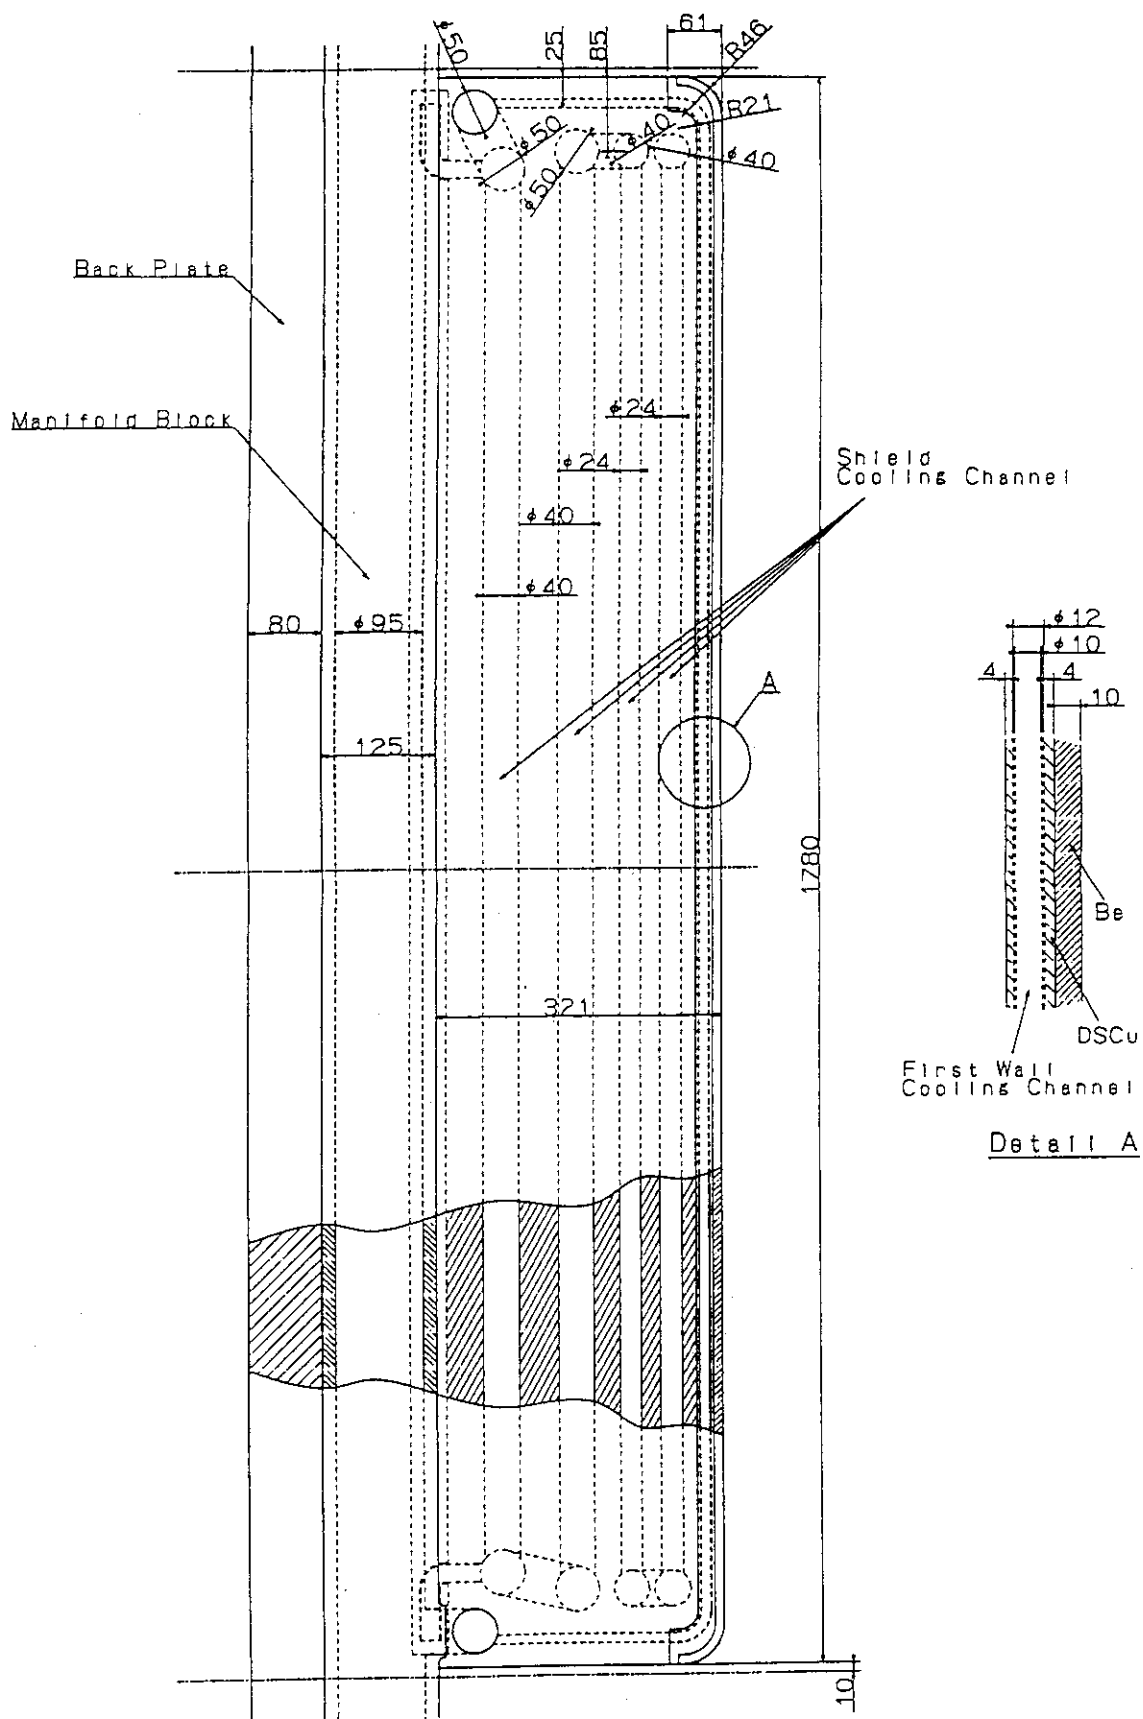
A Lateral View of the Inboard Blanket Module
